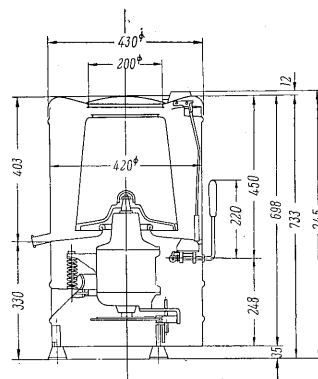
Outline of Fuji centrifugal dehydrating machine
